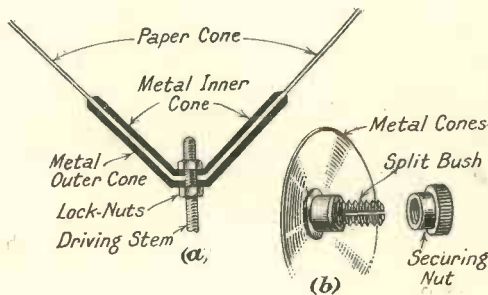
HOW THE CONE IS SECURED TO THE DRIVING STEM.
